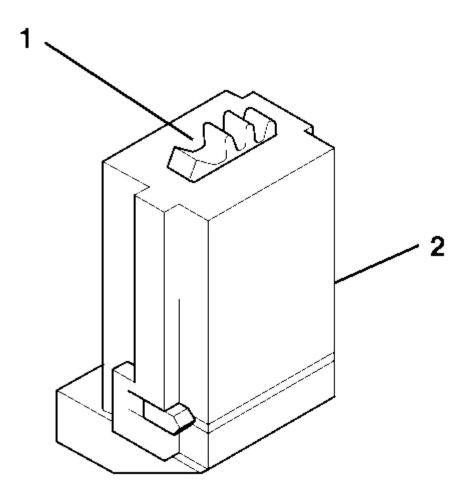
Aligning Gear In The Ignition Switch Courtesy of GENERAL MOTORS CORP.
